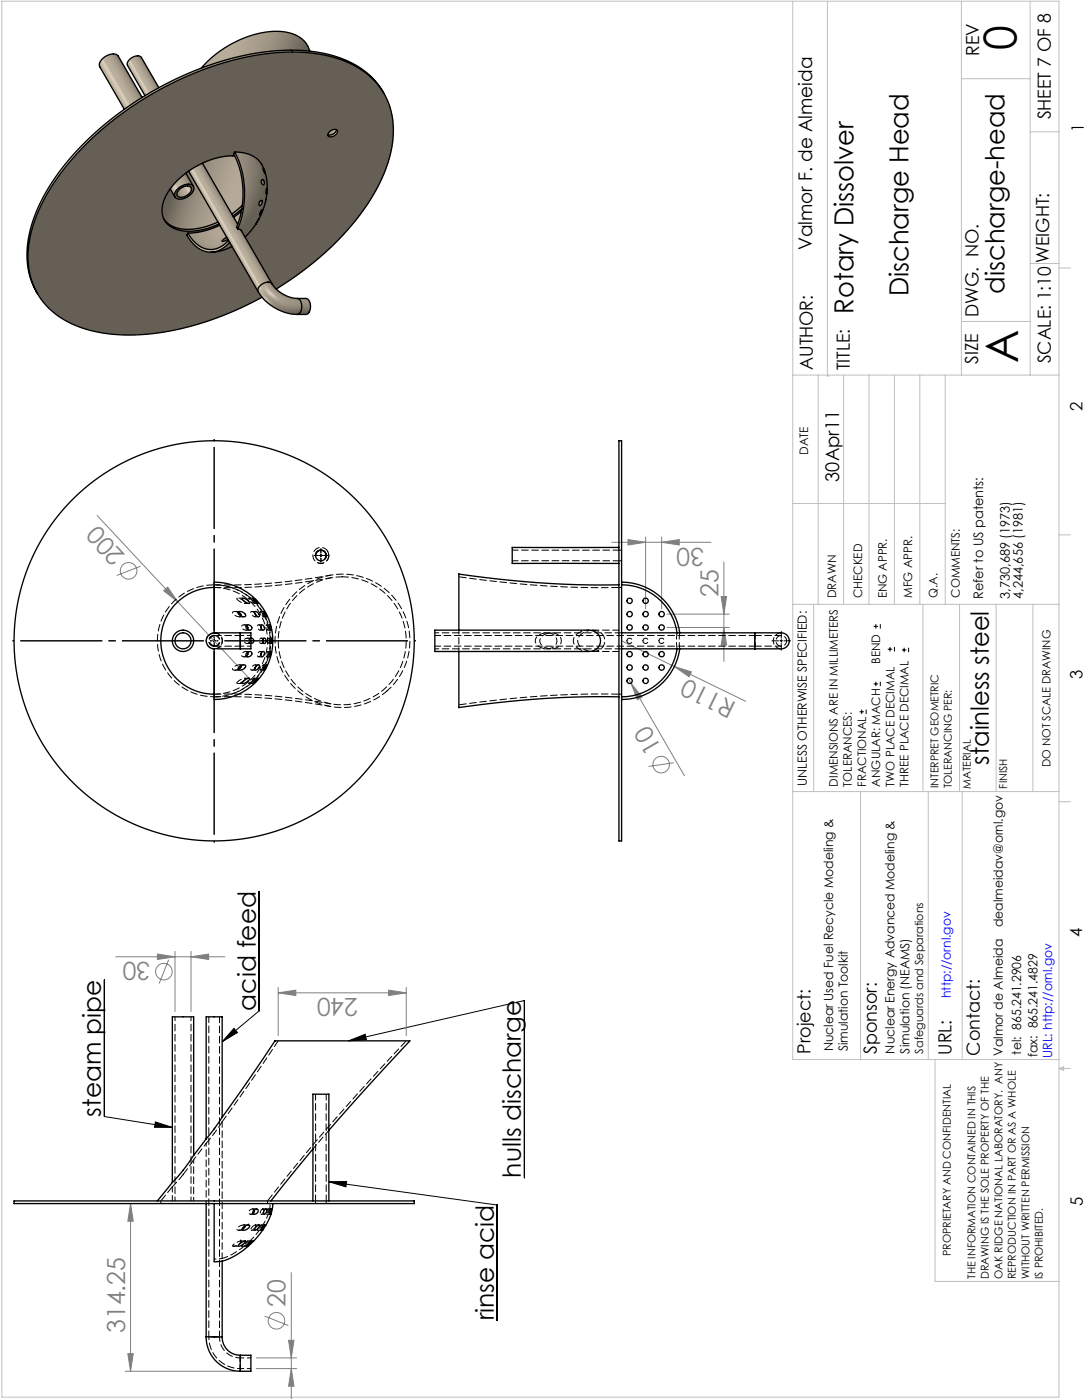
Rotary dissolver CAD discharge head drawing.
